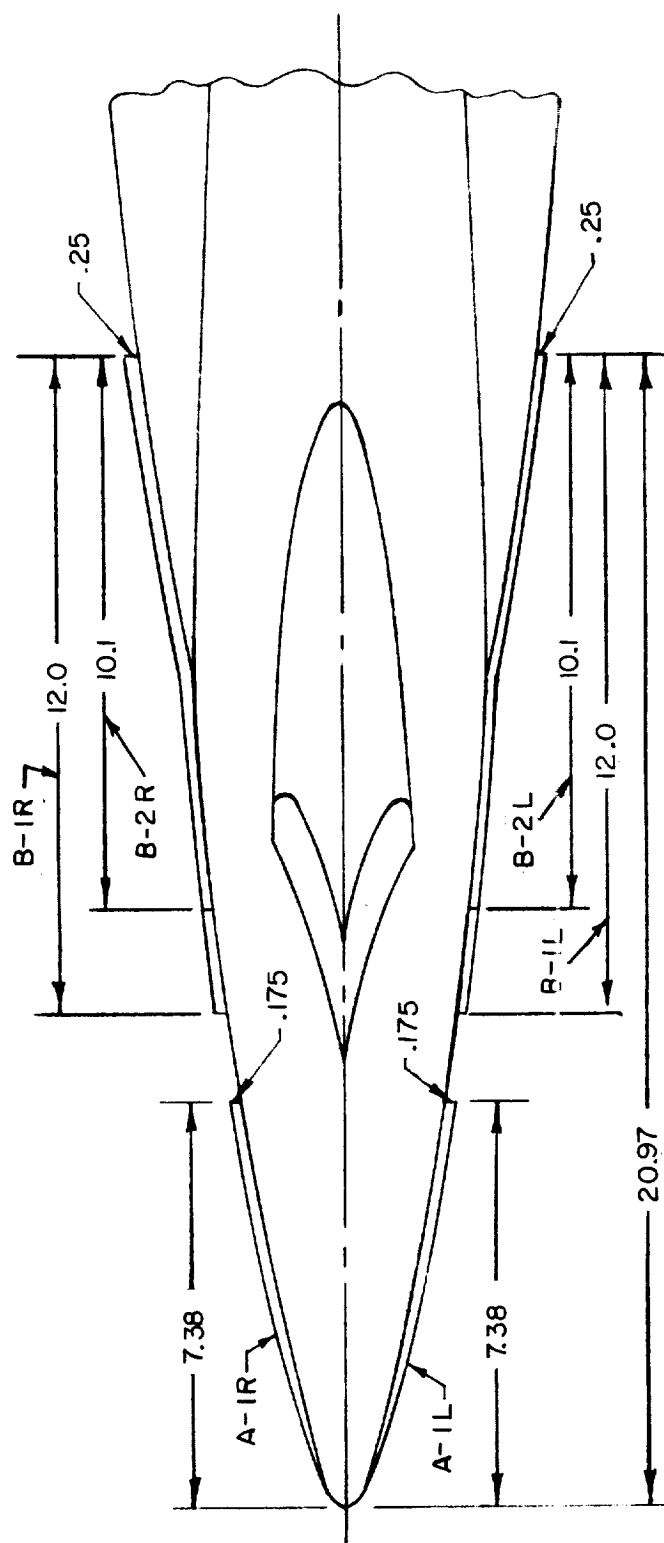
Sketch of nose of model indicating size and location of strakes. (Strakes located on fuselage reference line; all dimensions are in inches.)
